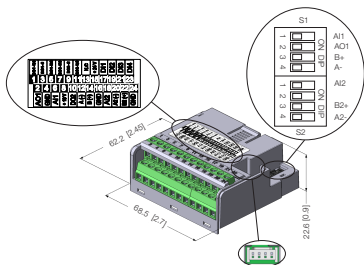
CRS485 dimensions in mm [in], DIP-switches location and MCard connector
